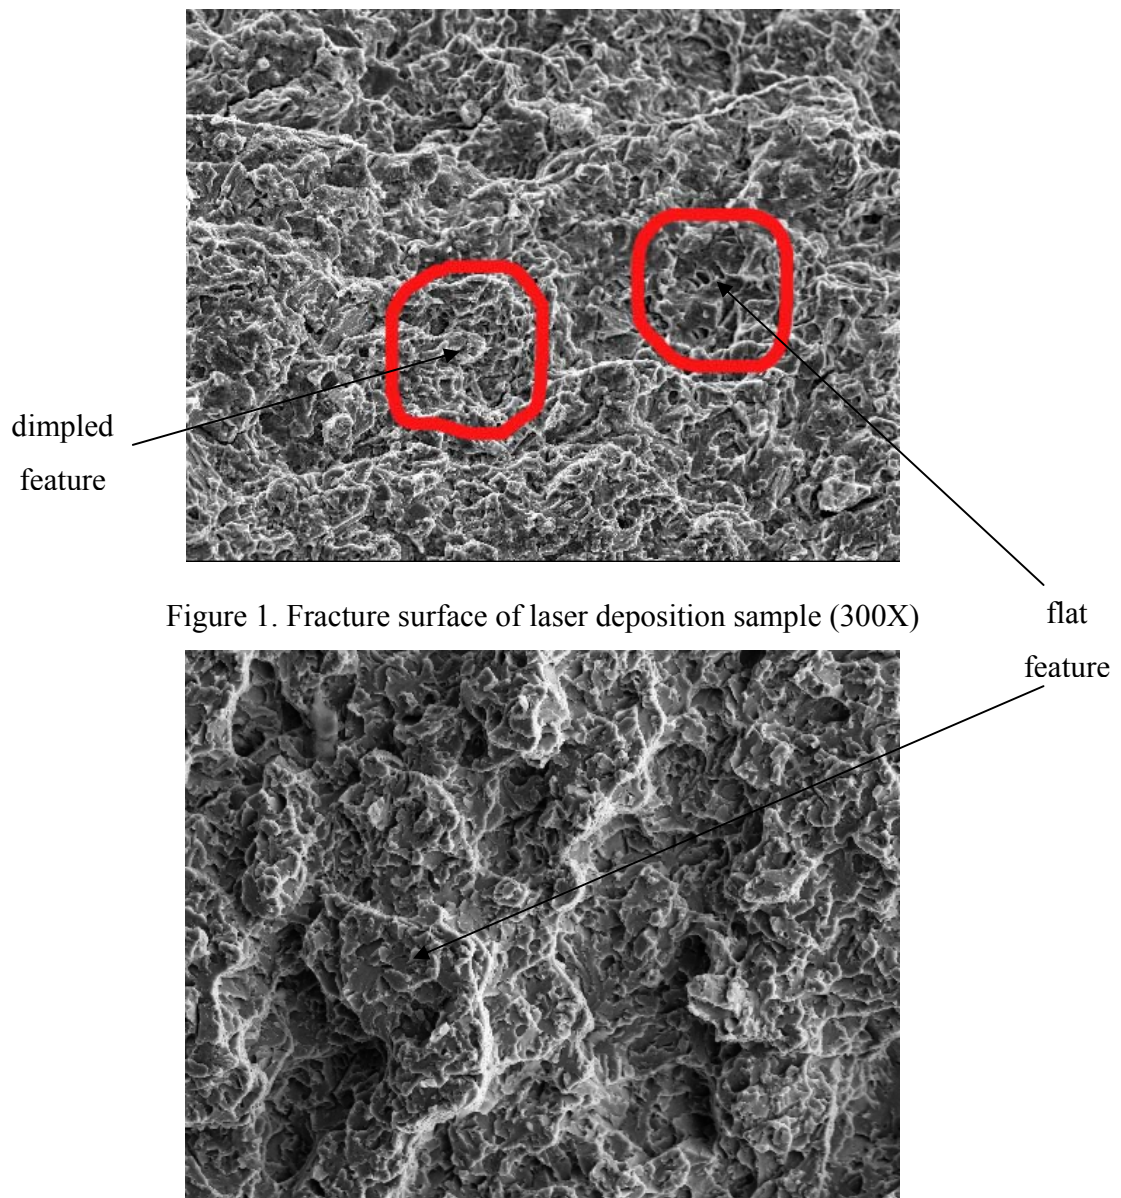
Fracture surface of laser deposition sample (300X)
